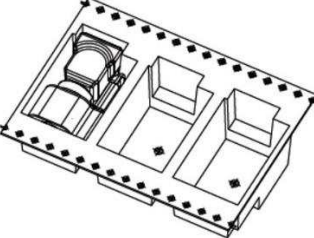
/ Bild 2: Packaging Dimensions [mm]
